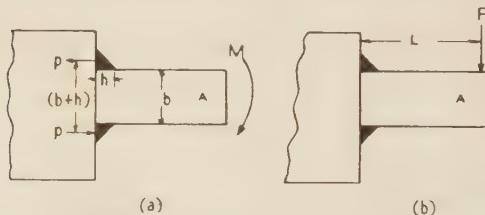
TRANSVERSE FILLET WELDS LOADED IN BENDING
